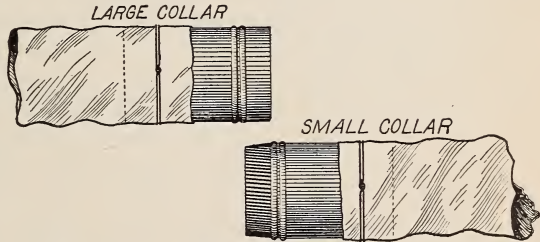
Methods of arranging collar connection at ends of canvas hose.
